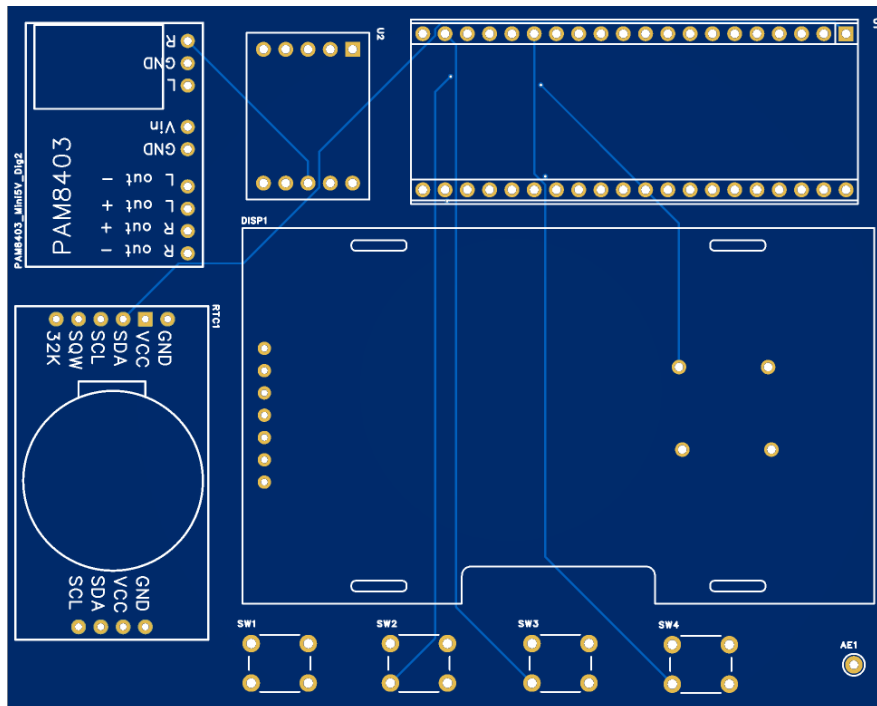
Top-down 3D view of the PCB layout displaying key component footprints and button arrangements. The layout ensures optimal spacing and logical grouping of modules to simplify assembly.
